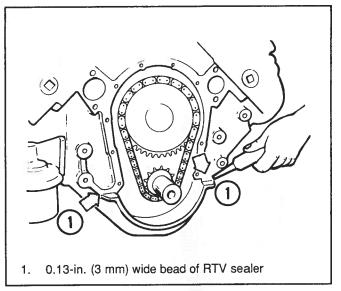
RTV Sealer Application To Oil-Pan-To-Cylinder-Block Joints
